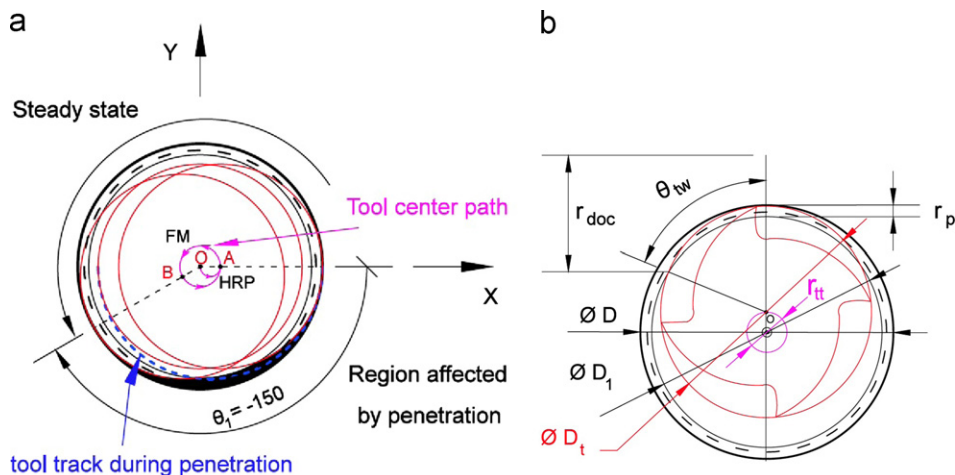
Thread milling process in aerial view: (a) analysis of penetration on steady state and (b) geometrical parameters.
